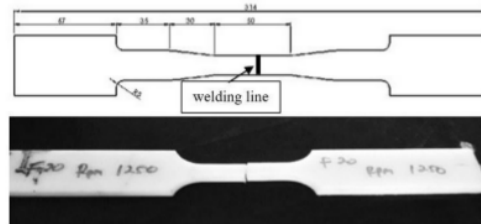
Dimension and photo of tensile test specimen (in mm)
